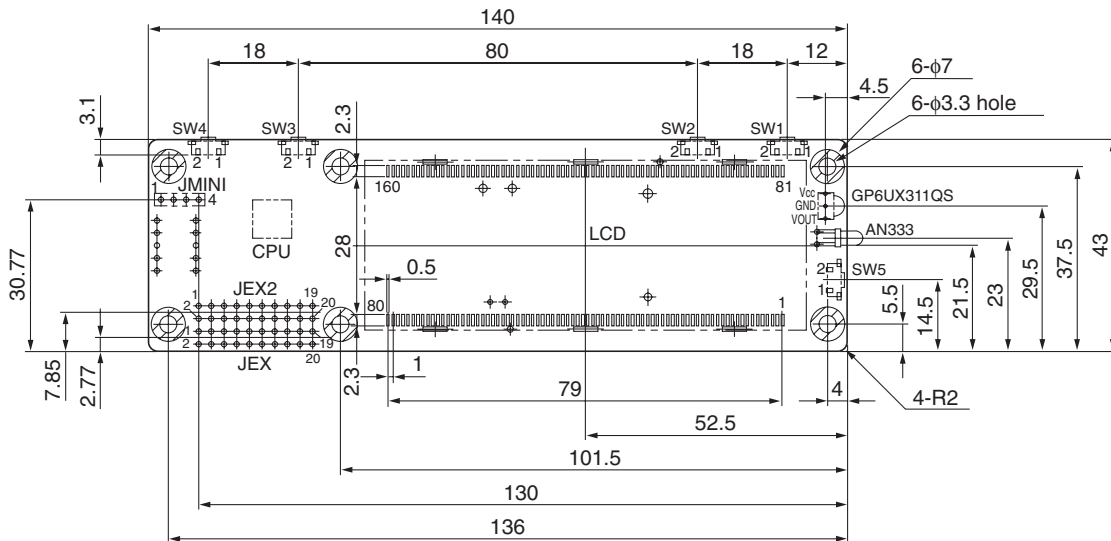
Dimensions of the CPU Board (Front)
